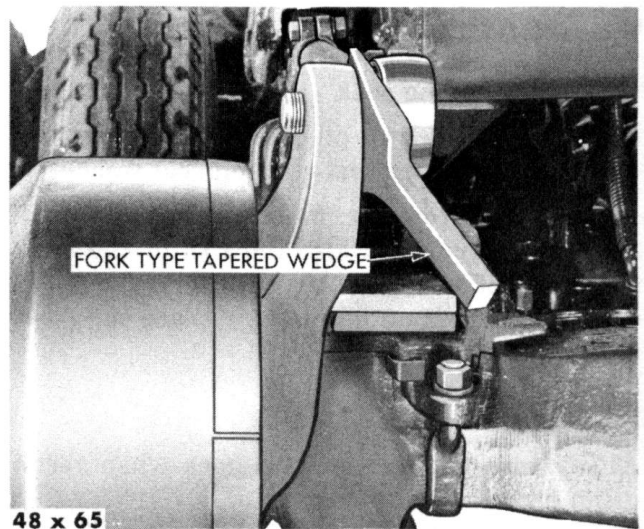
Removing Upper Torque Rod (Axle Housing End) Fork, DD-1091
